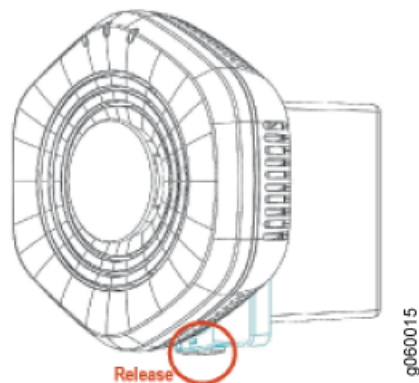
Faceplate Secured to the Wall-Mount Bracket
